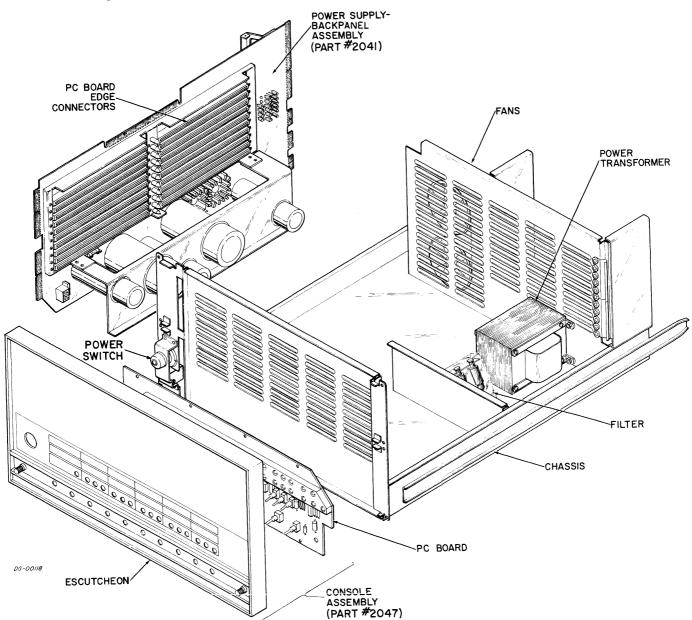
Exploded View of The Nova 1220 Computer With Central Processor and Memory Cards Removed
